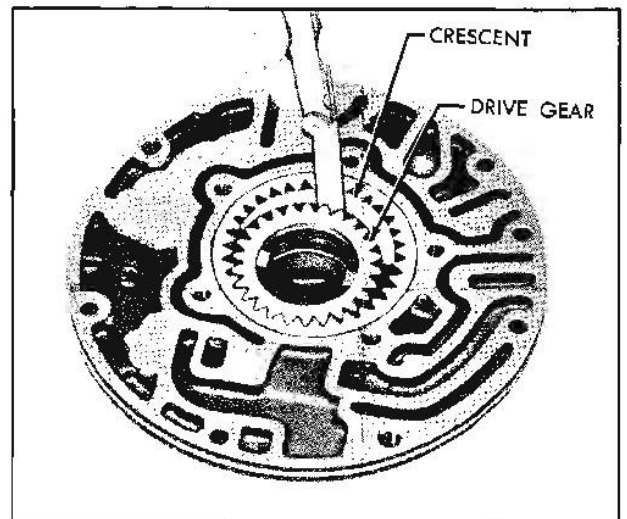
B-107 Checking Drive Gear to Crescent Clearance
